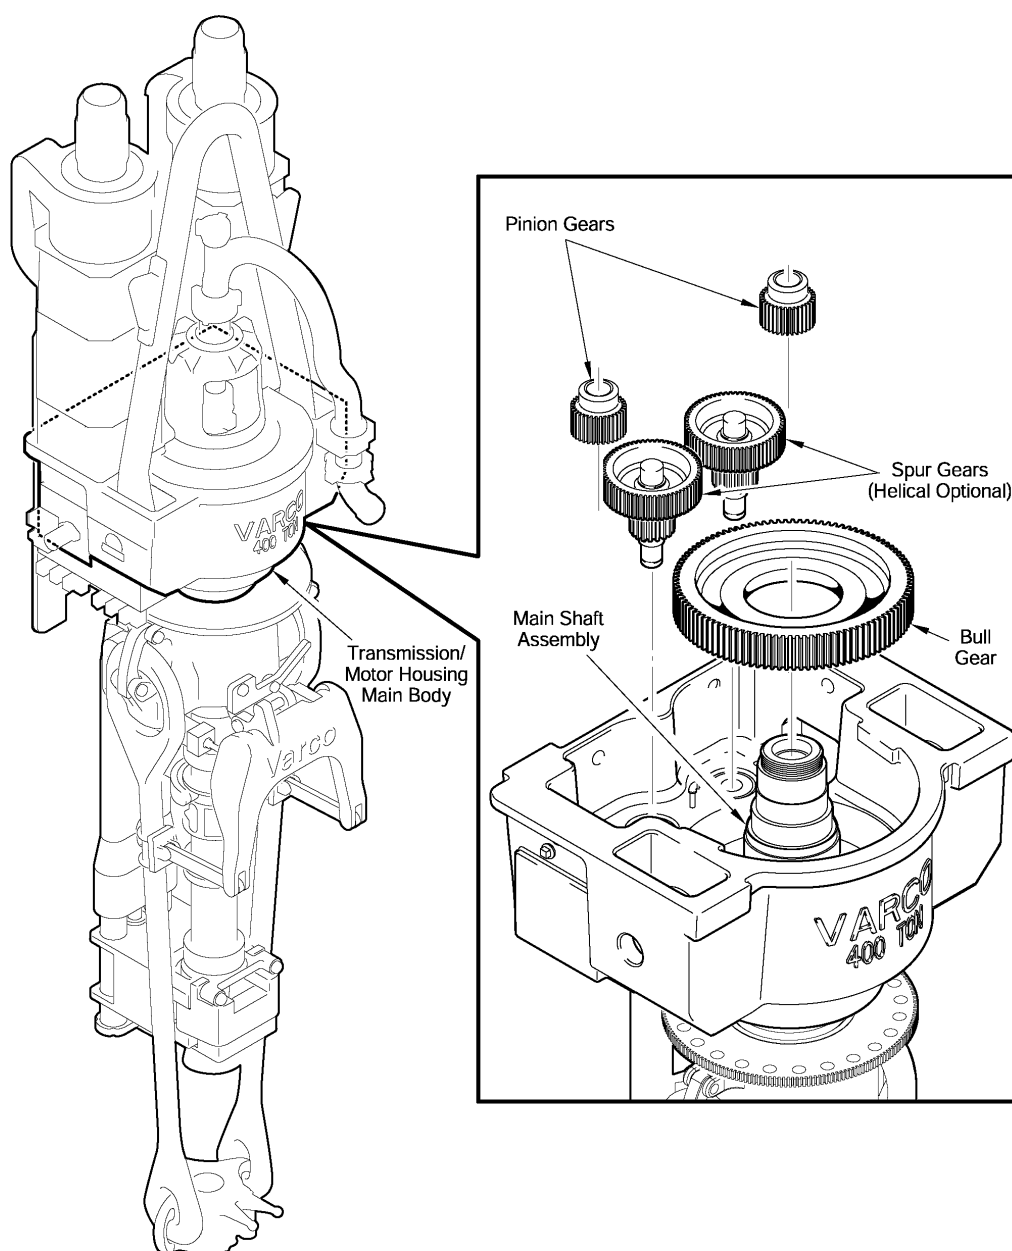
Transmission/motor housing (main body) and swivel assembly
